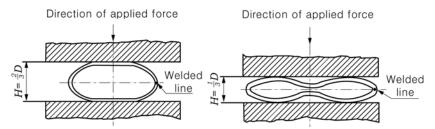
Flattening test of electric-resistance welded steel pipes Grade 1
